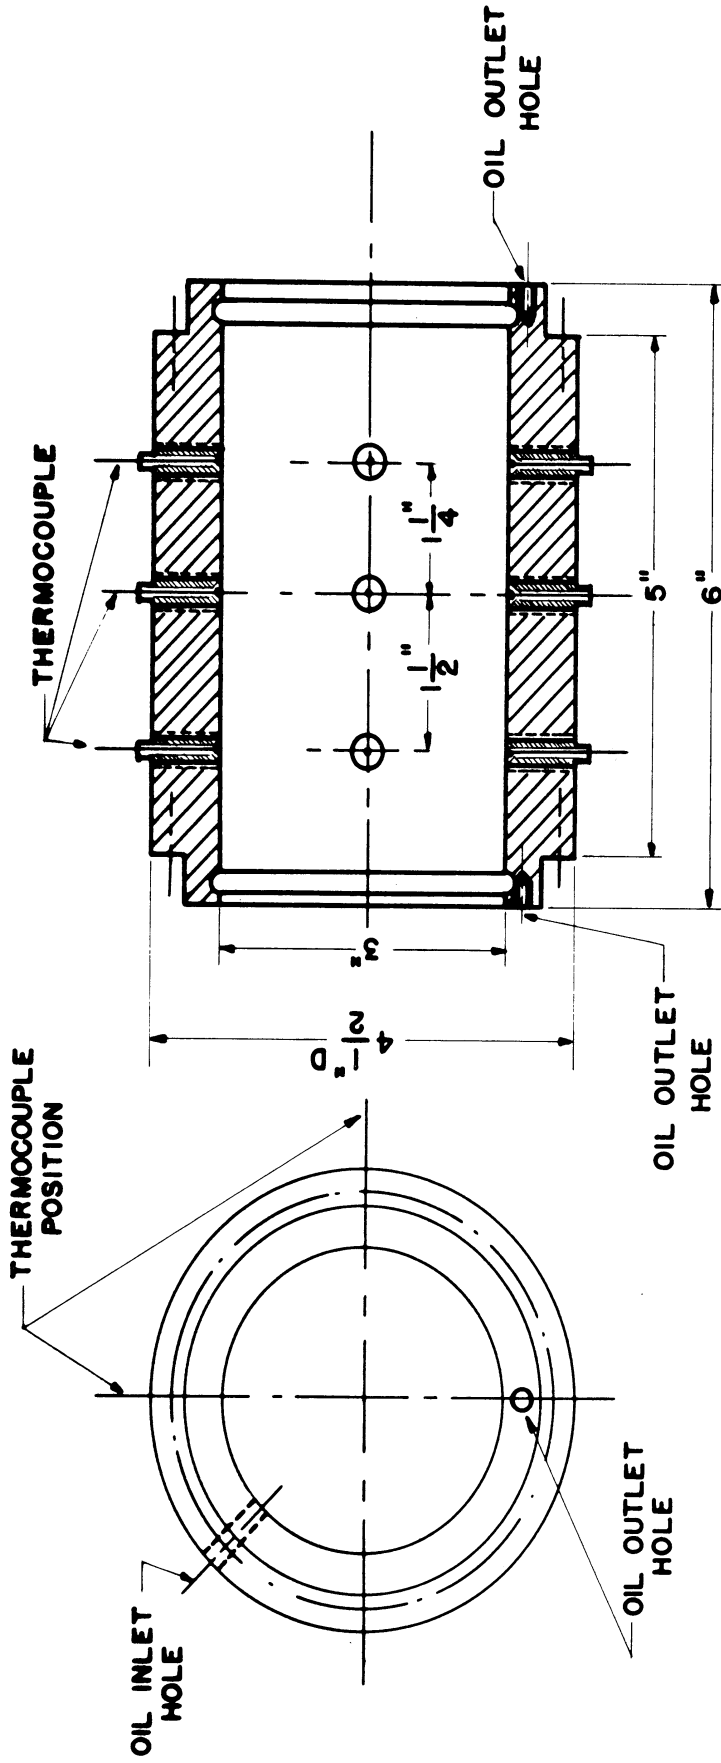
The Bearing, Showing the Thermocouple Locations, Inlet and Outlet Oil Holes.
